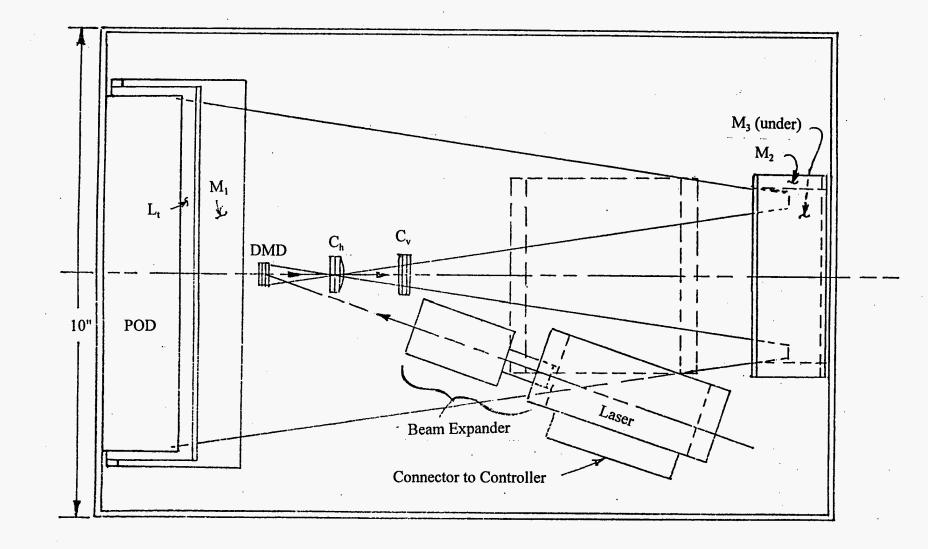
Packaging Design Layout -- Plan View $Scale = \frac{1}{2}$
